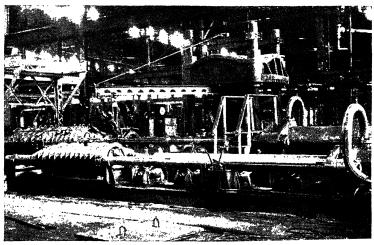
Modern draw bench used in forging projectiles. About six sets of dies e e re the diameter is reduced in that many steps. (Baldwin-Southwark.)
